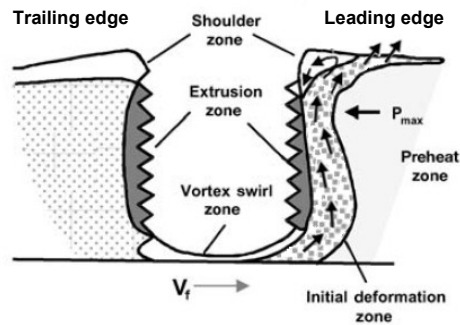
Schematic of friction stir tool geometries in longitudinal view showing the leading and trailing edge when using the tool rotates in clockwise direction [46].
